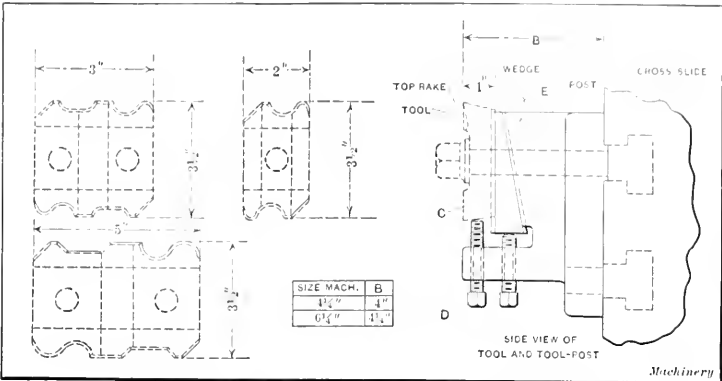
Diagram illustrating Tool-holders for holding Large Flat Forming Tools and Proportions of Large Flat Forming Tools
